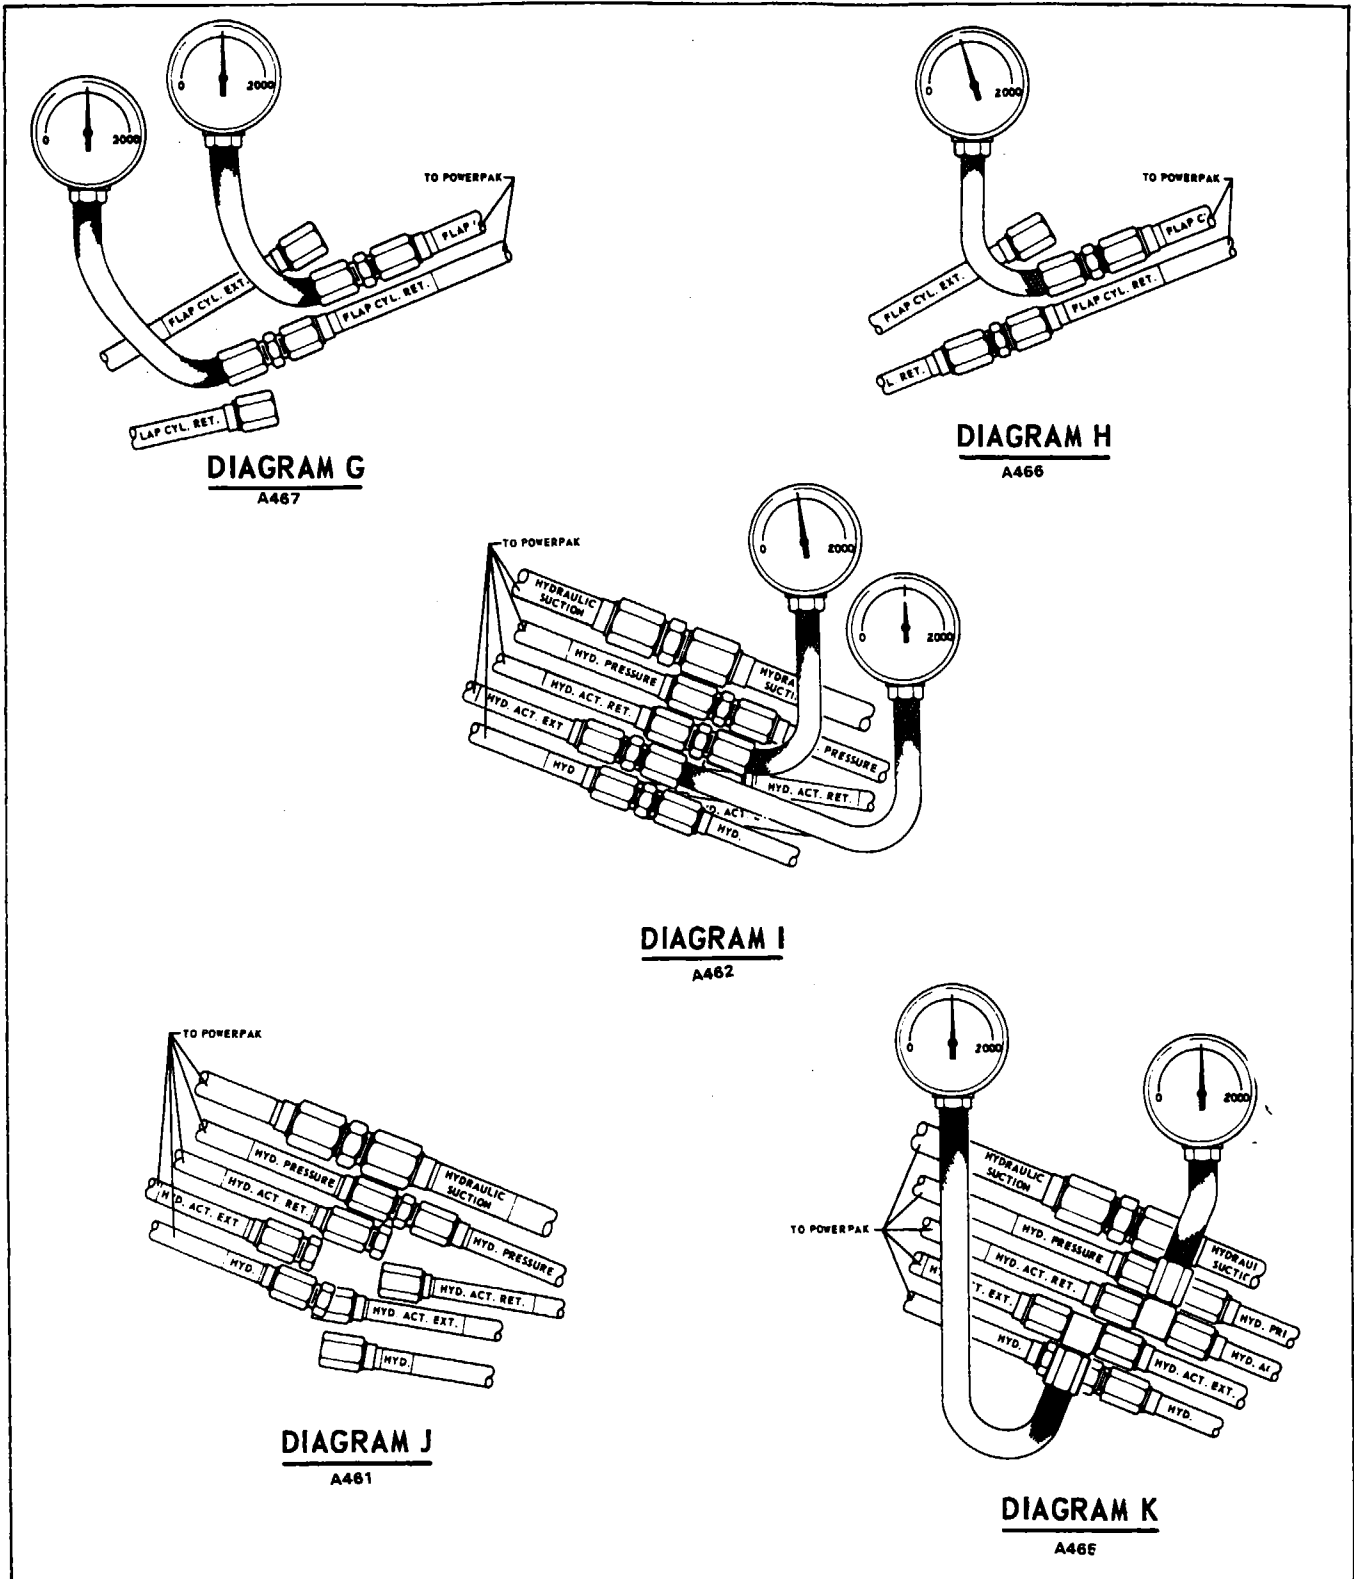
Hydraulic System Checking Diagrams, PA-23-250 (six place),
